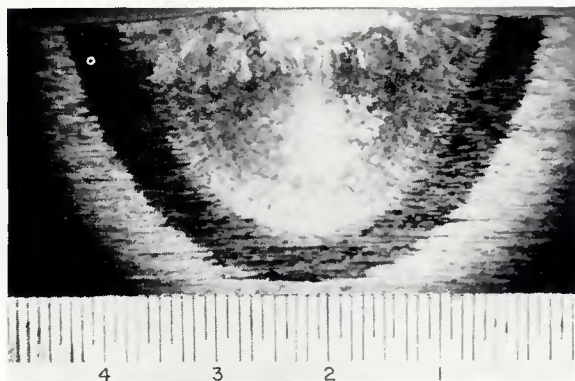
Macrograph showing HAZ and nugget — Cu backing
